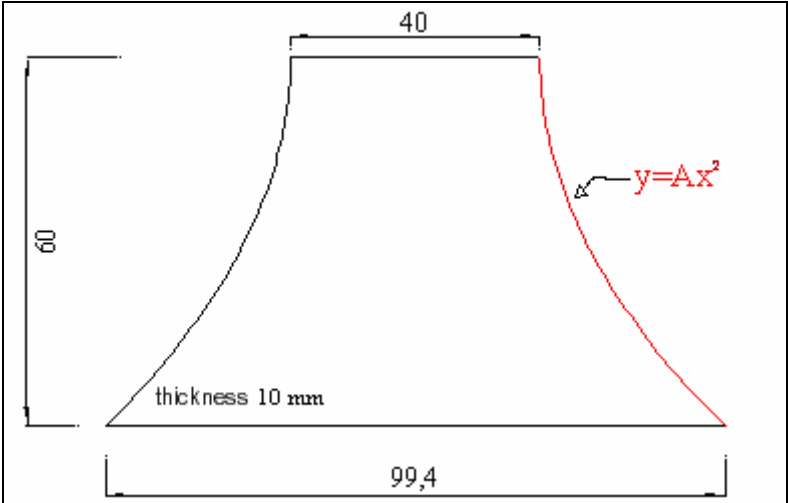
Shape of the plexiglas plate to be made at the inlet
